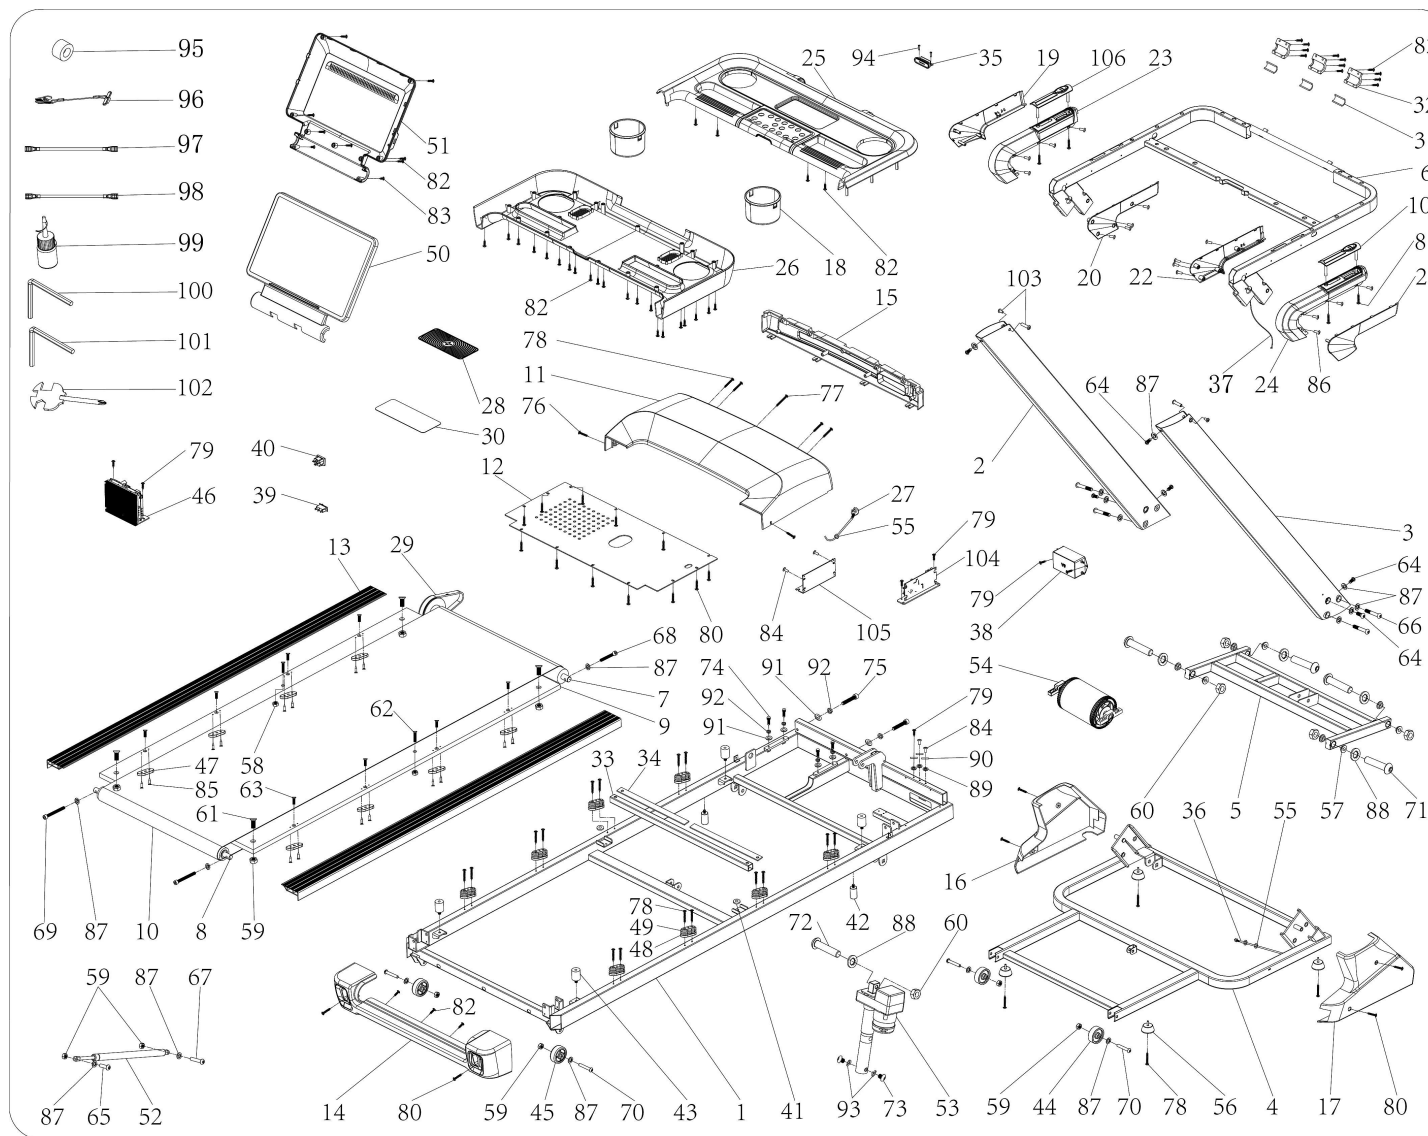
Exploded diagram of the Treadmill Bodyflex PRO T3000
